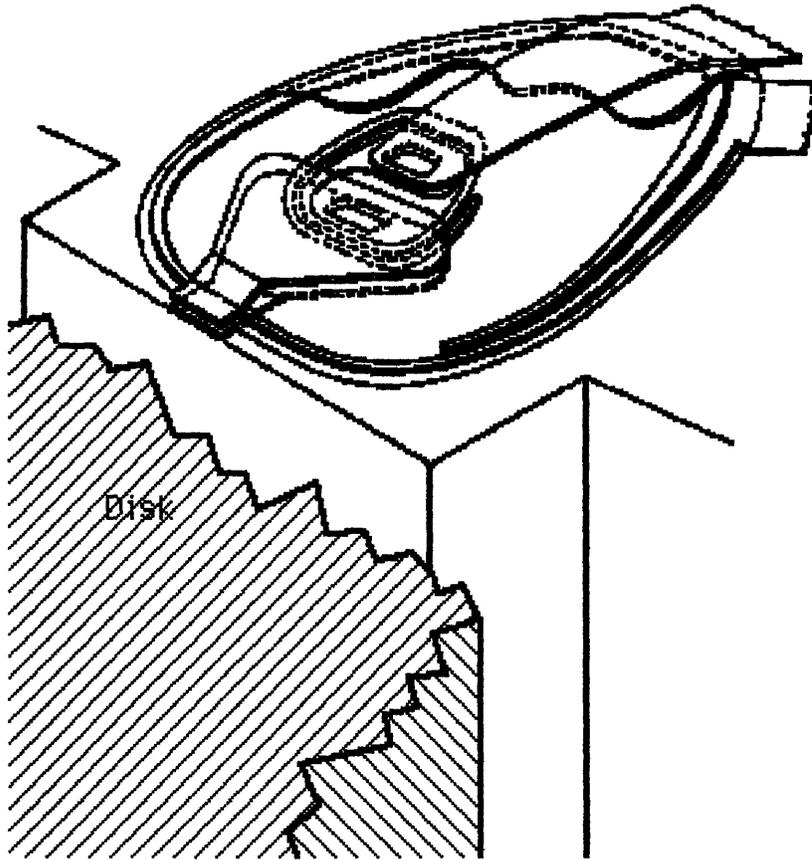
⁸: Cutaway drawing of inductive element mounted on a slider
